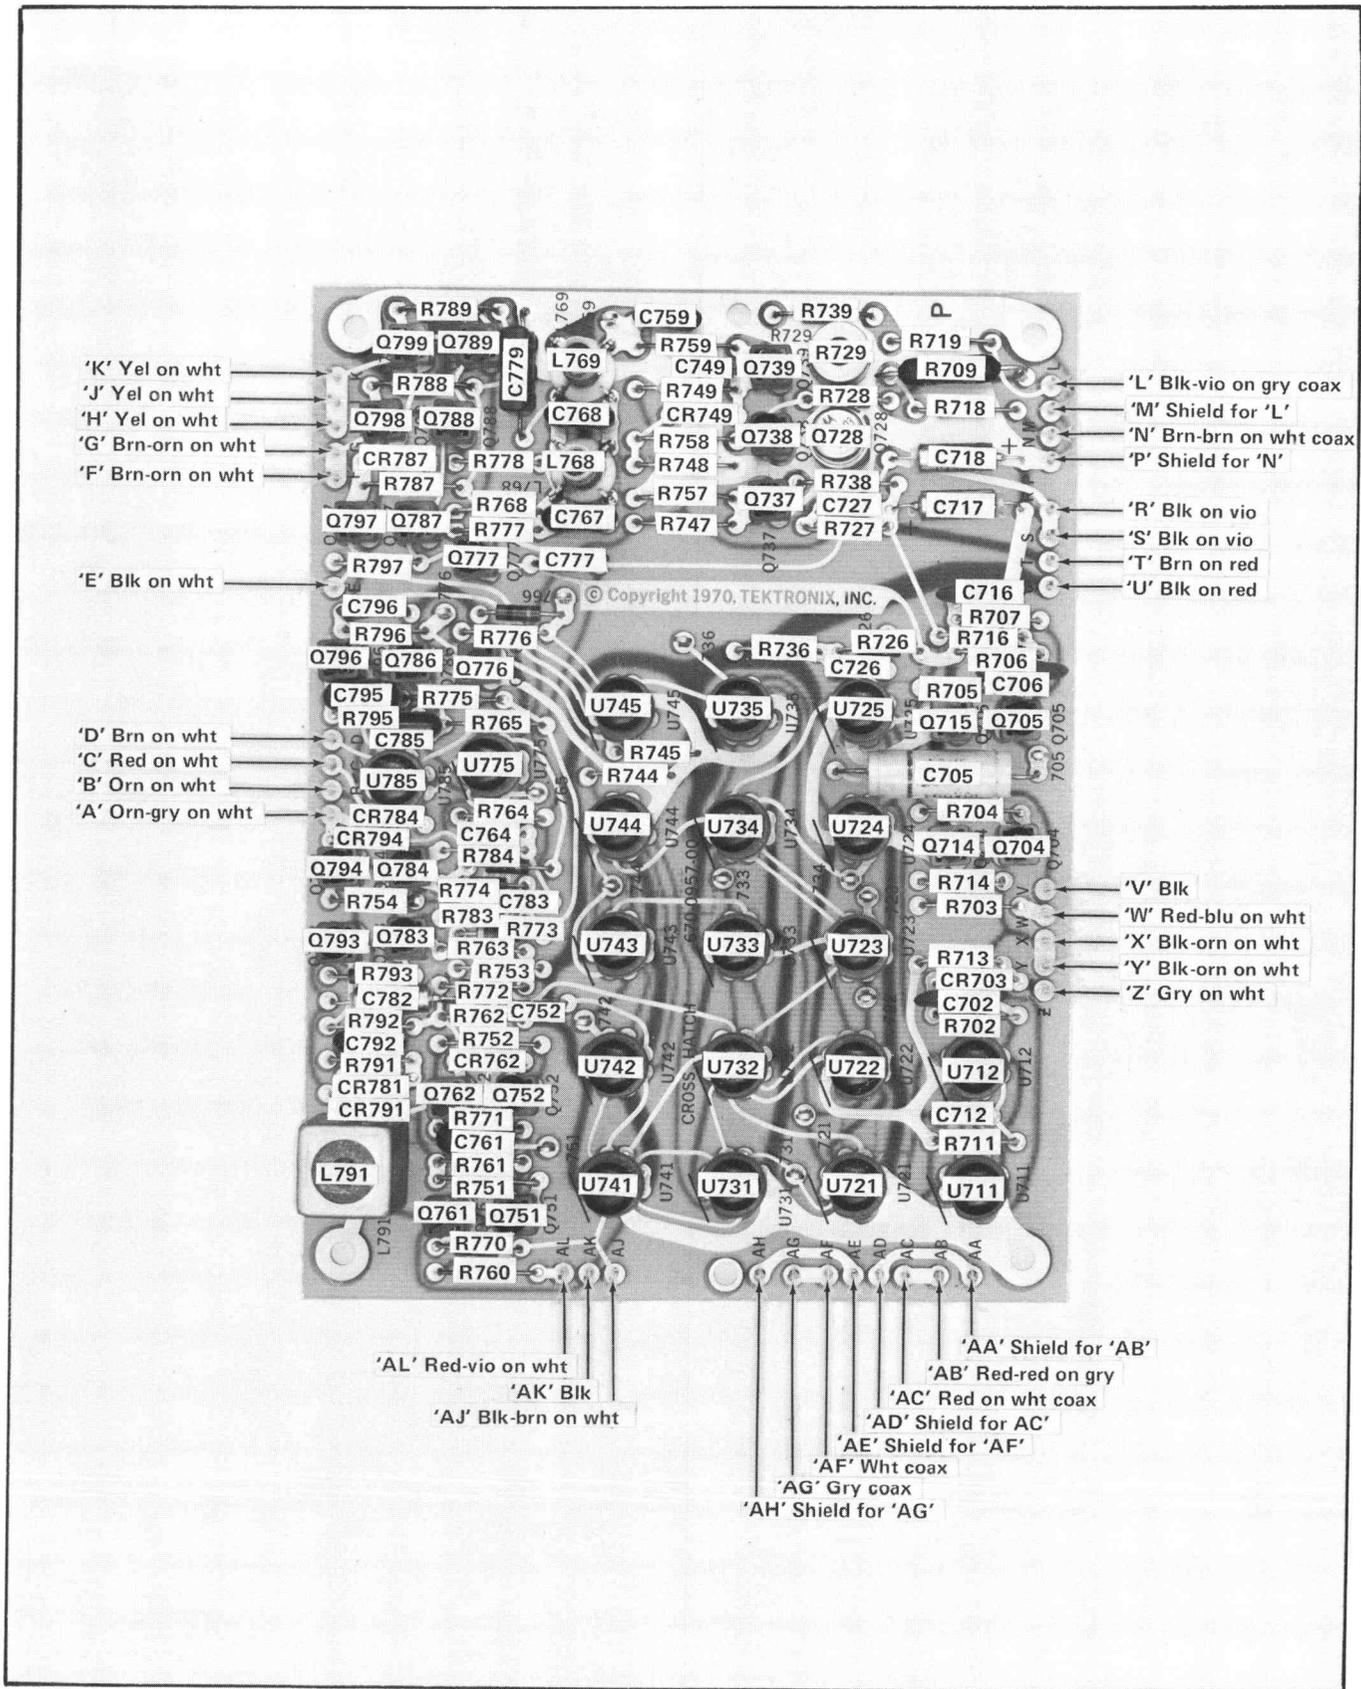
CROSSHATCH and DOT GENERATOR board; component identification and wire color code.
